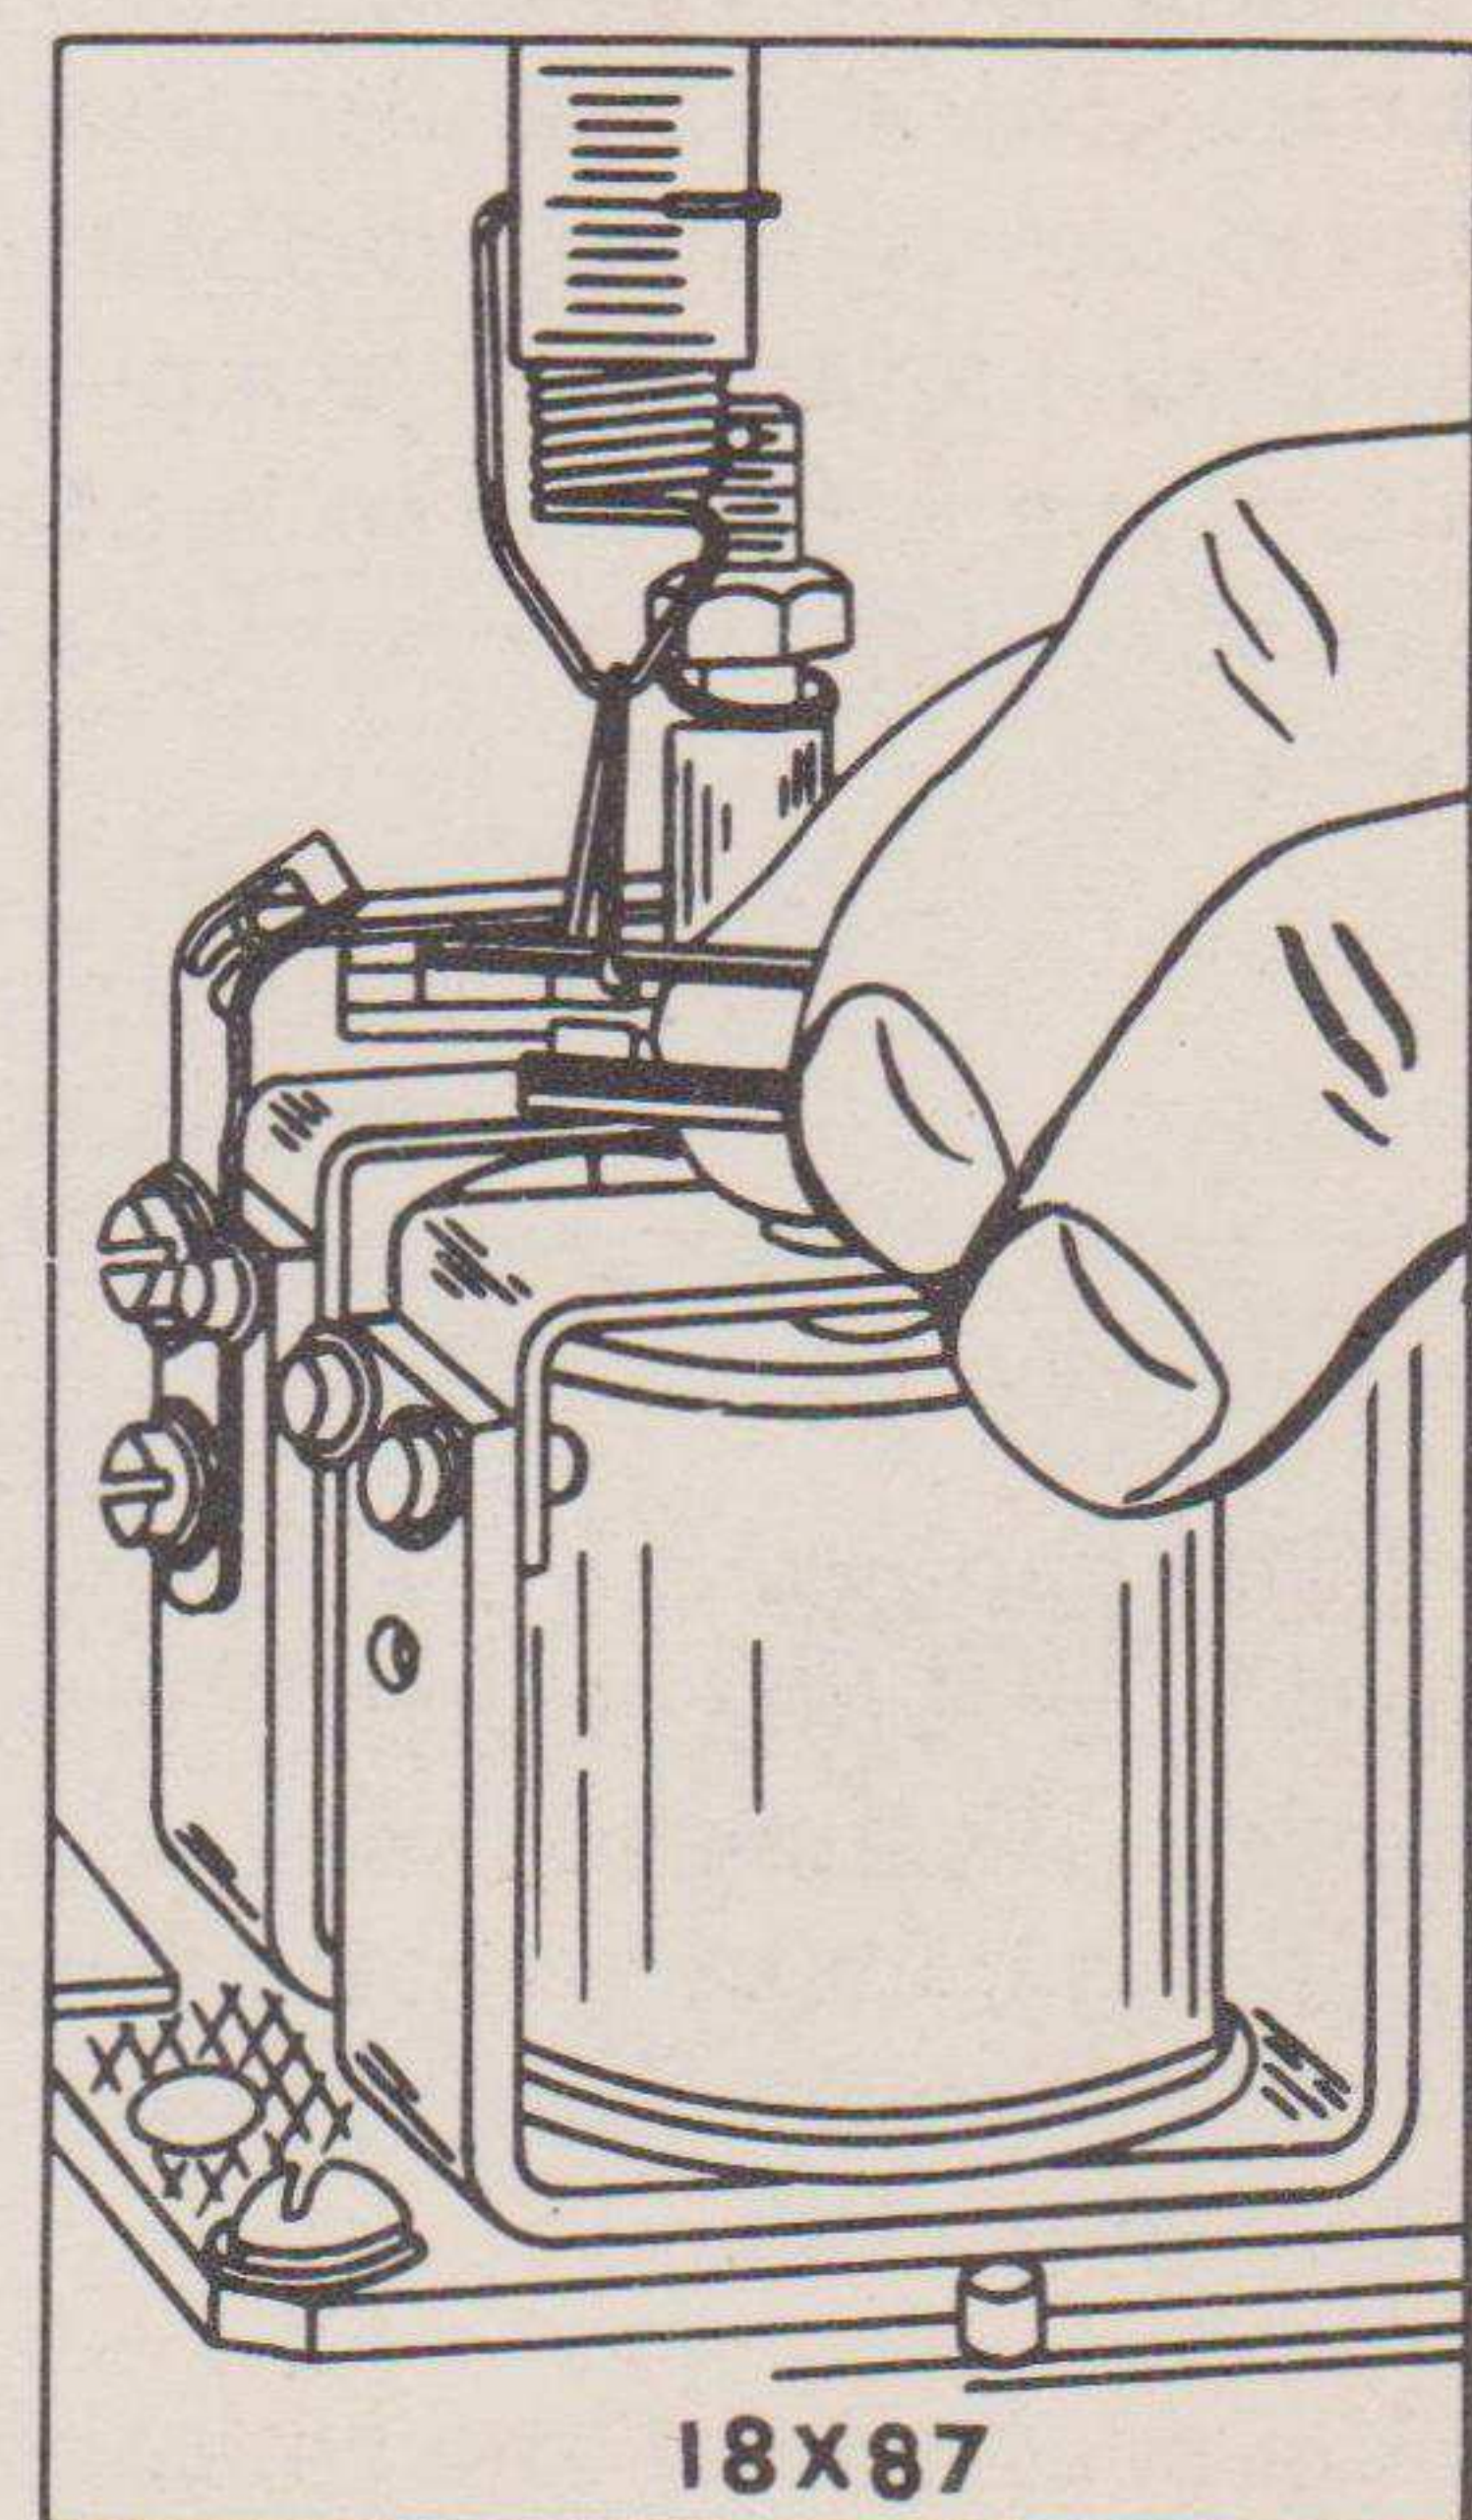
Checking Pressure of Contact Points with Spring Scale
